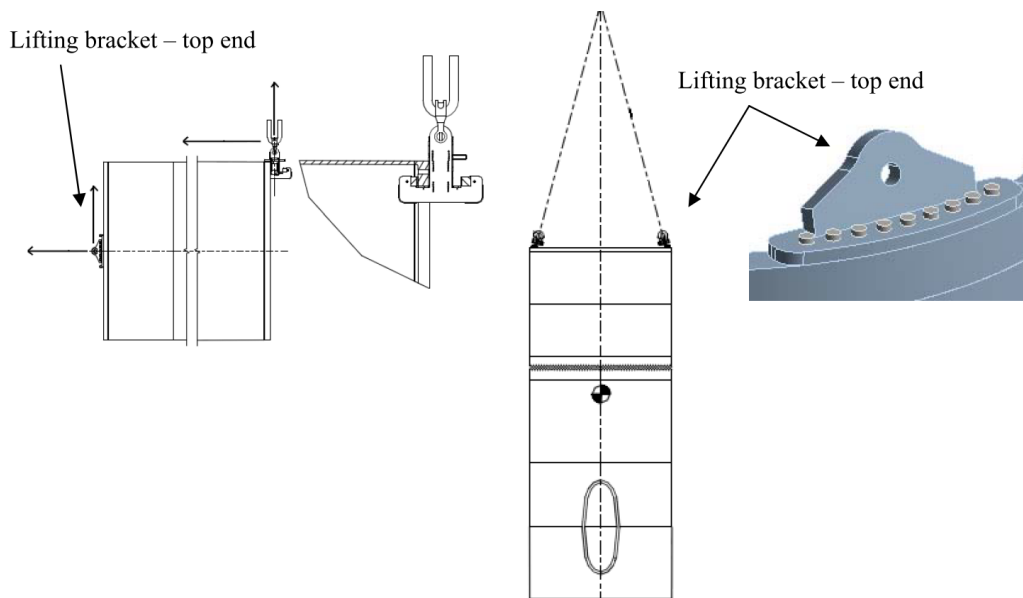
T-hook (left) and tower lifting bracket (right) [1].
